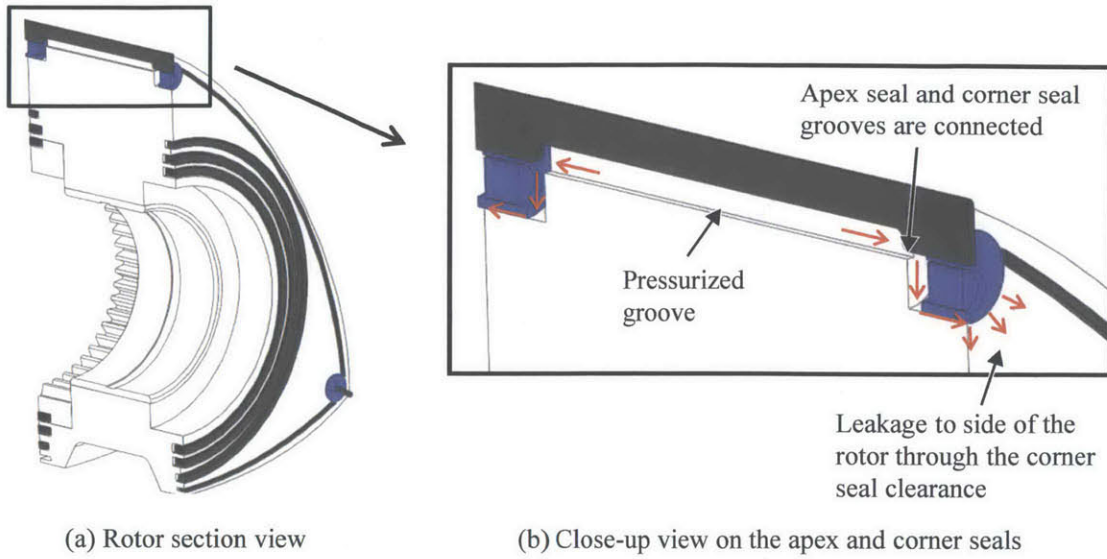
(a) Rotor section view and (b) leakage from the apex groove to the rotor side
